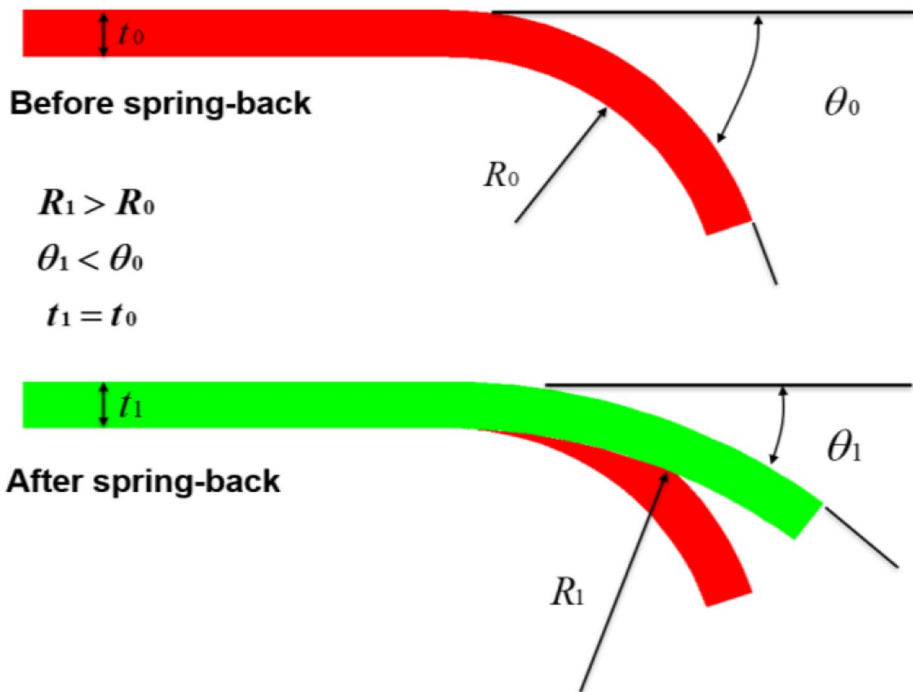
Definition of the spring-back angle and radius for the metal sheet forming process
